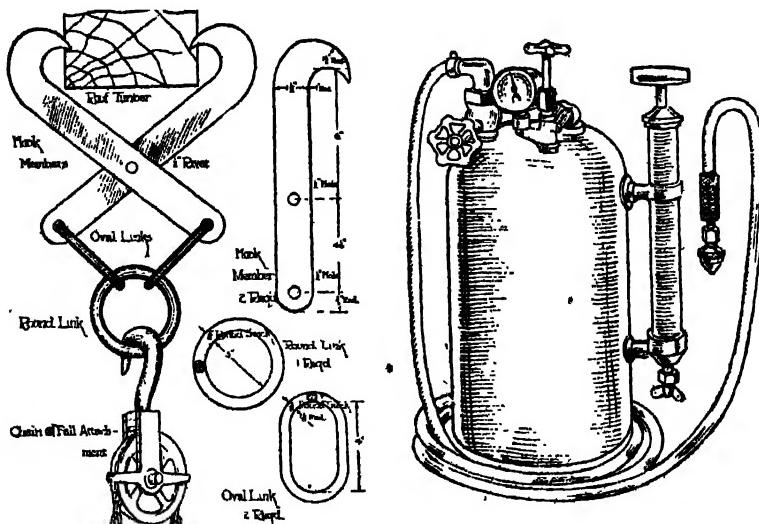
Outlining Construction of Supporting Member for Chain Fall Attachment and Appliance for Cleaning Machine Parts with a Gasoline Spray.
